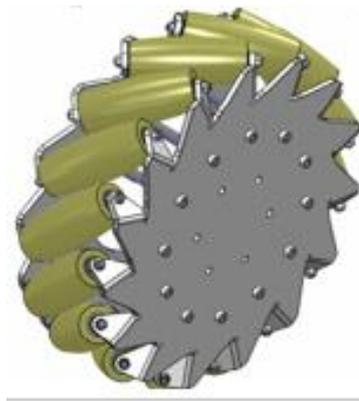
Mainly made of aluminum plate (254mm Mecanum Wheels with PU roller, 2015).
